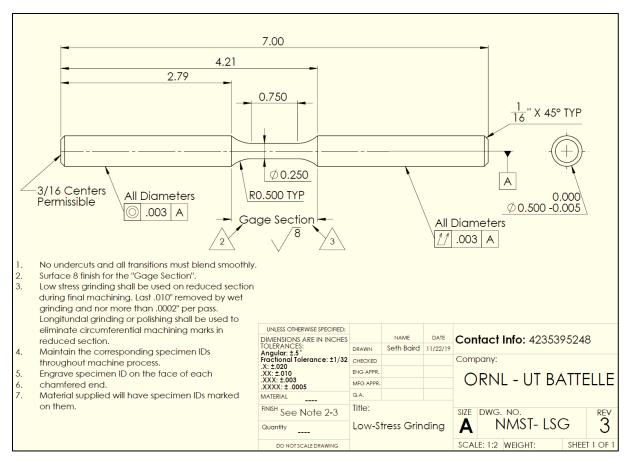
Standard fatigue and CF specimen geometry used at ORNL. Dimensions are in inches.
